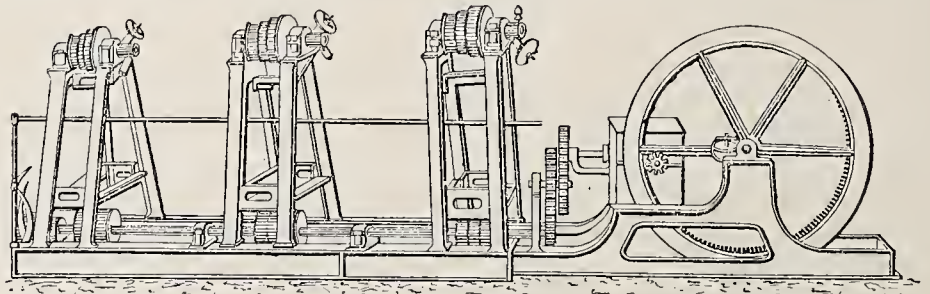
A MODERN TYPE OF TAPING MACHINE
